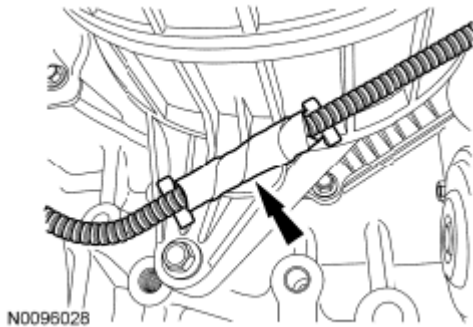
Locating A/C Compressor Wiring Harness Pin-Type Retainer
